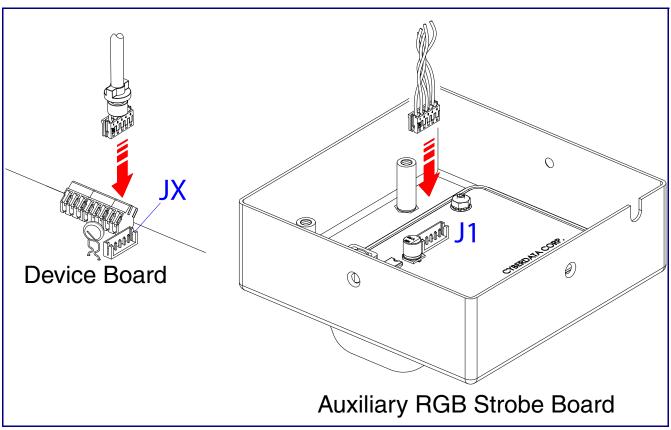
Connecting the Auxiliary RGB Strobe Kit to the Device
